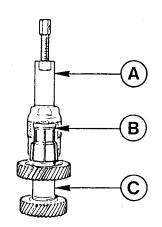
Fit input shaft bearing in front transmission housing (shown with Special Tool 15-064).
